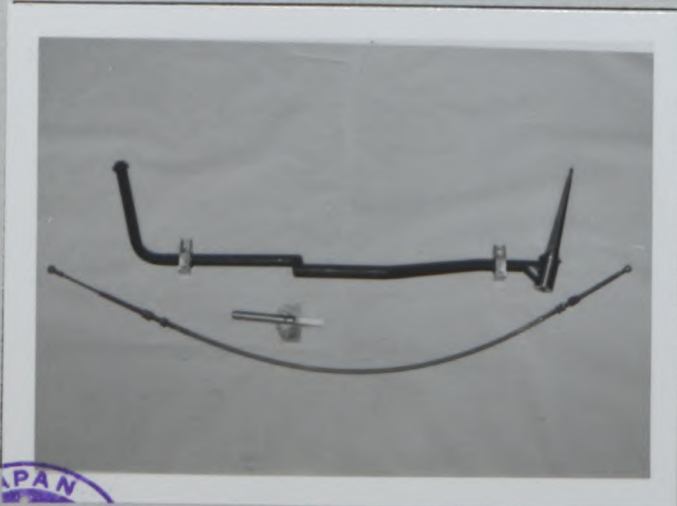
NEW BRAKE CALIPER POSITION, OPTIONAL
